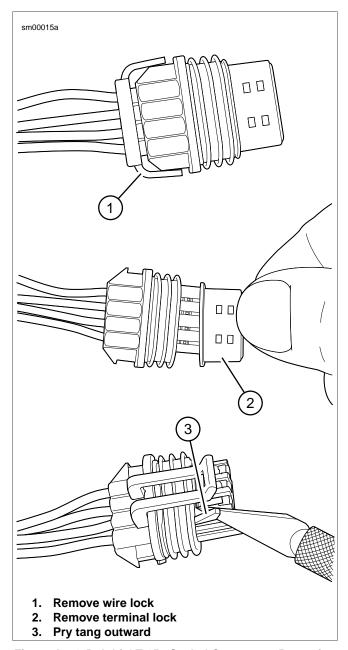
Delphi GT 150 Sealed Connector: Removing Socket Terminals
